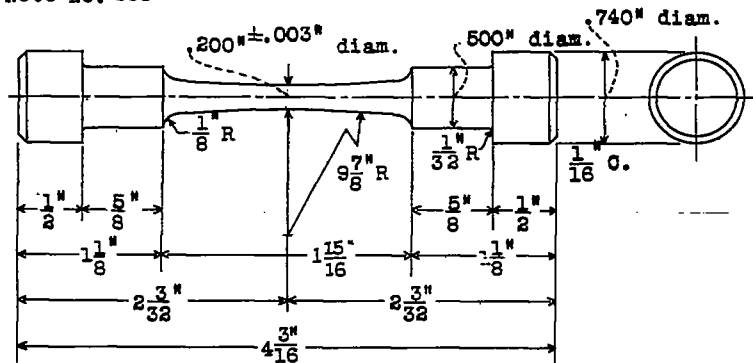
Fatigue specimen used in direct tension-compression machine.
